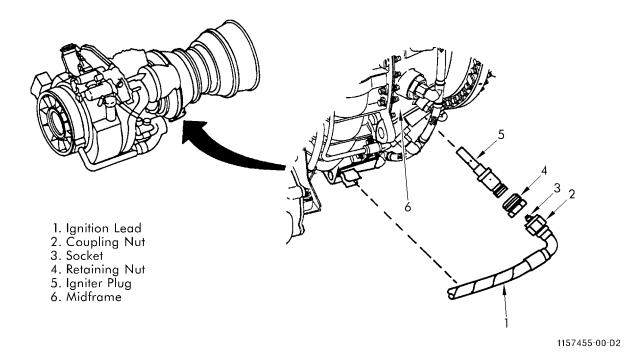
(T700) Igniter Plugs; Removal and Installation
